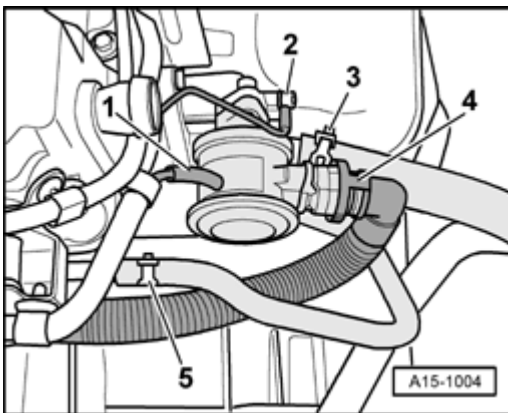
Disconnecting Air Hose And Vacuum Hose At Combination Valve For Secondary Air Injection System
